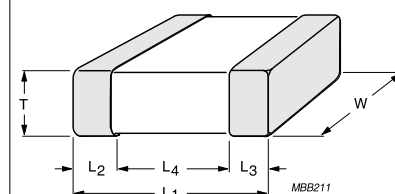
Surface mounted multilayer ceramic capacitor dimension
